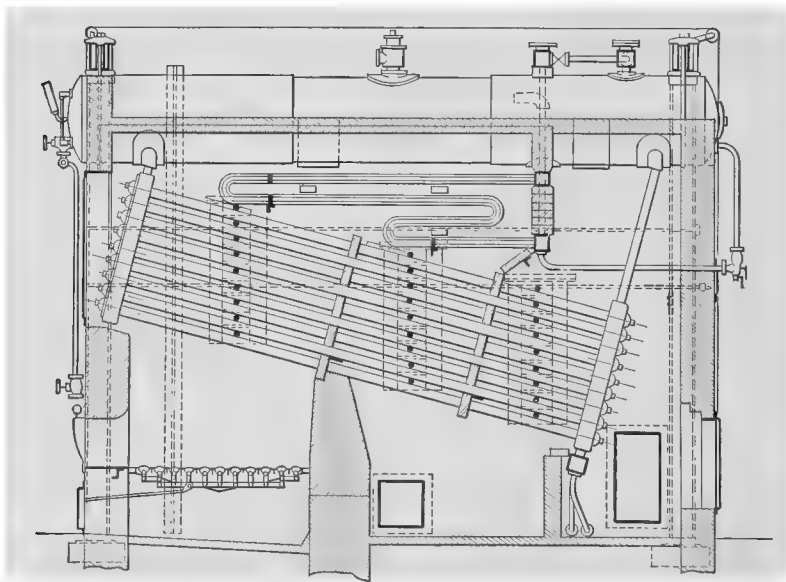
Boiler and superheater for 200 pounds pressure and 150° F. superheat. Babcock & Wilcox type.
